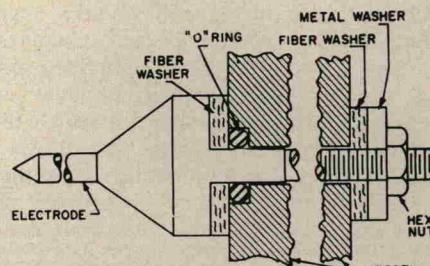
ELECTRODE ASSEMBLY, O-RING TYPE.
